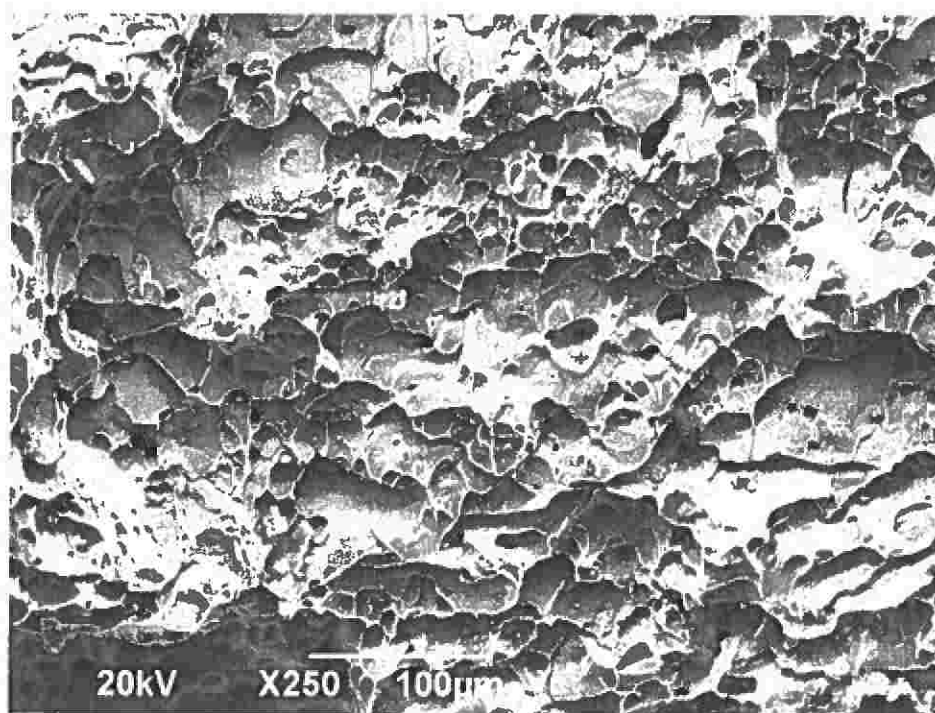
Image from SEM examination of the fracture surface. The morphology of the fracture surface shows distinct cup and cone features indicating ductile fracture.
